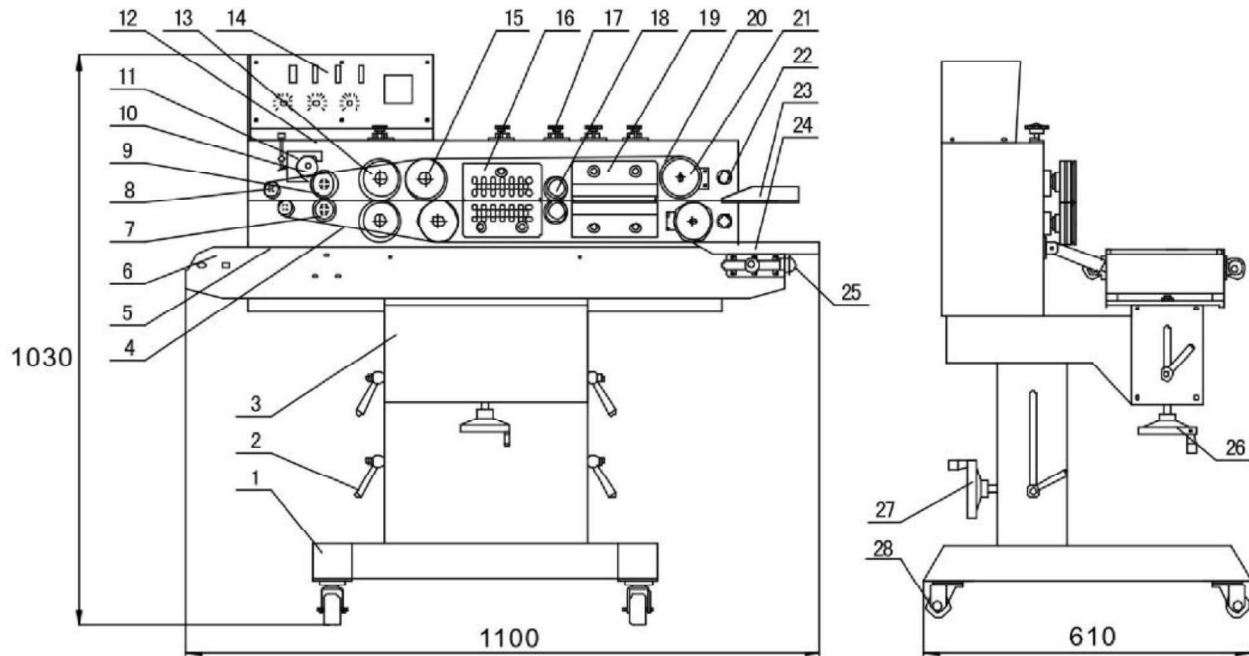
FRM-1120C (1) Pedestal, (2) Lock Handle, (3) Slide Block for Bracket, (4) Guide Belt, (5) Conveyor Belt, (6) Conveyor Table, (7) Silicone Wheel, (8) Guiding Wheel (small), (9) Printing Wheel, (10) Solid Ink Roller, (11) Ink Roller Heat Block, (12) Housing Case (13) Embossing Wheel (14) Control Panel (15) Driving Wheel, (16) Cooling Block, (17) Adjusting Knob, (18) Pressing Wheel, (19) Heating Block, (20) Sealing Belt, (21) Driven Wheel, (22) Cam Shaft, (23) Guide, (24) Work Table, (25) Adjusting Knob for Conveyor, (26) Lifting Hand Wheel of Conveyor Table, (27) Lifting Hand Wheel of Complete Unit, (28) Casters
